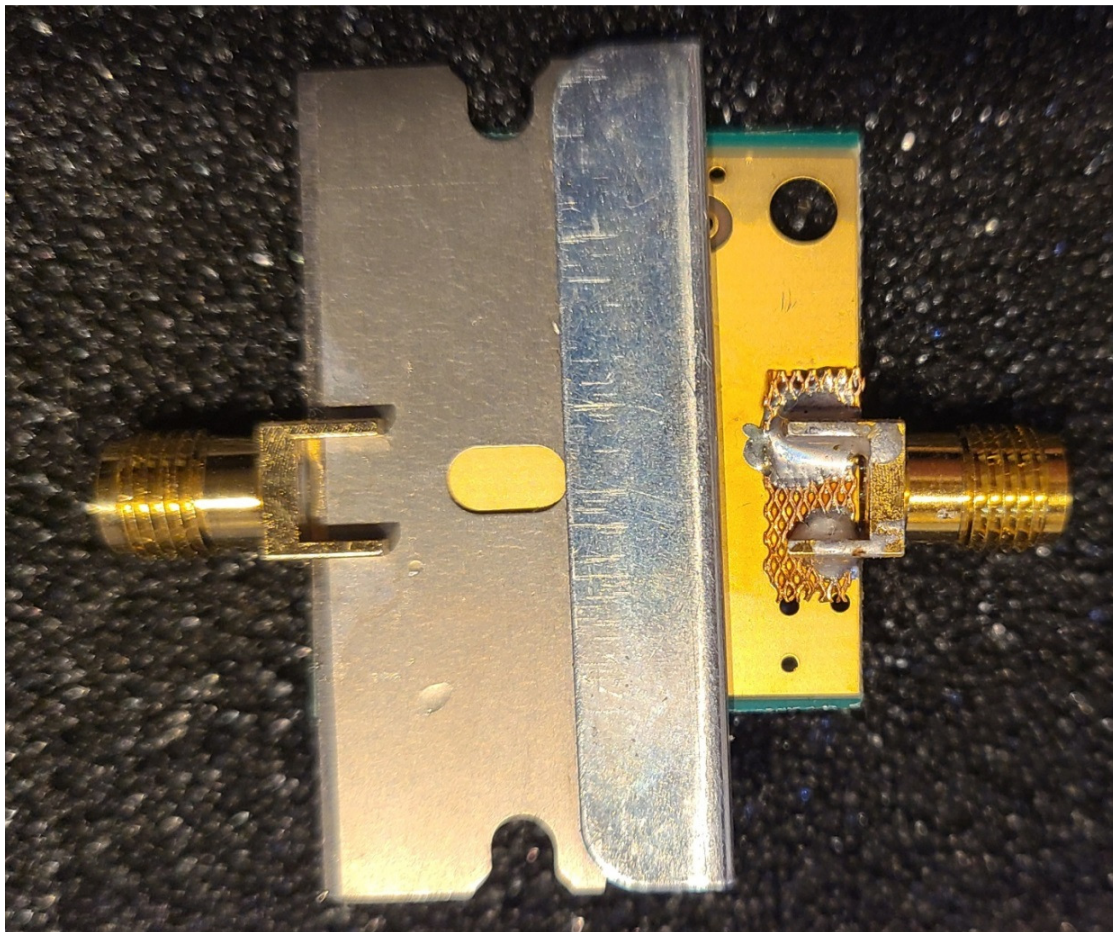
Shimming for soldering SMA edge connectors on very thin PC board
